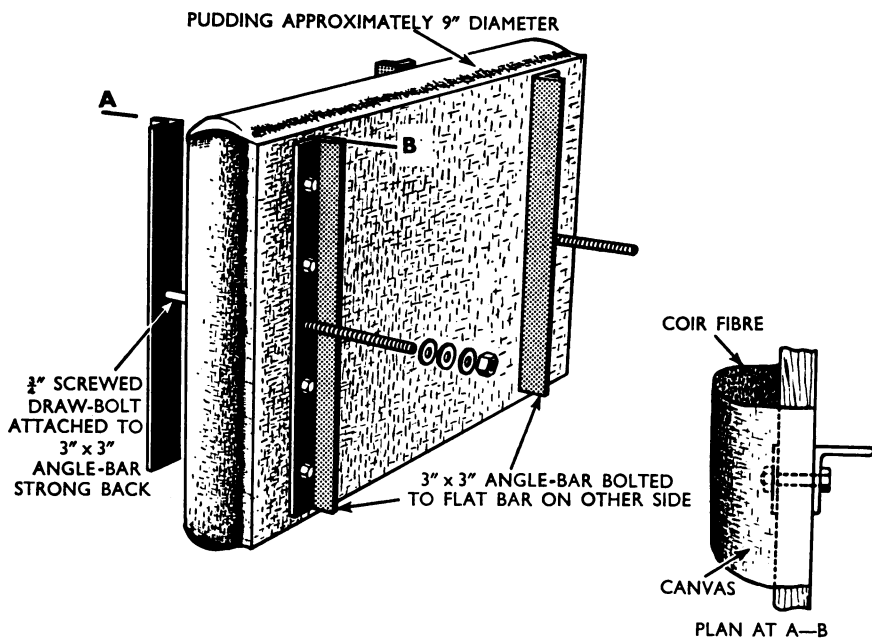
Simple wooden pad—details of construction, showing draw-bolts
